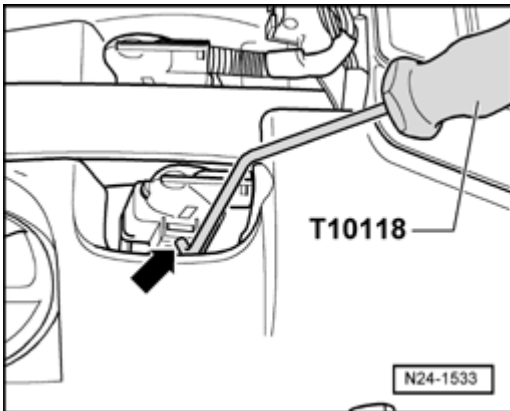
Identifying Assembly Tool T10118 On Release Button
